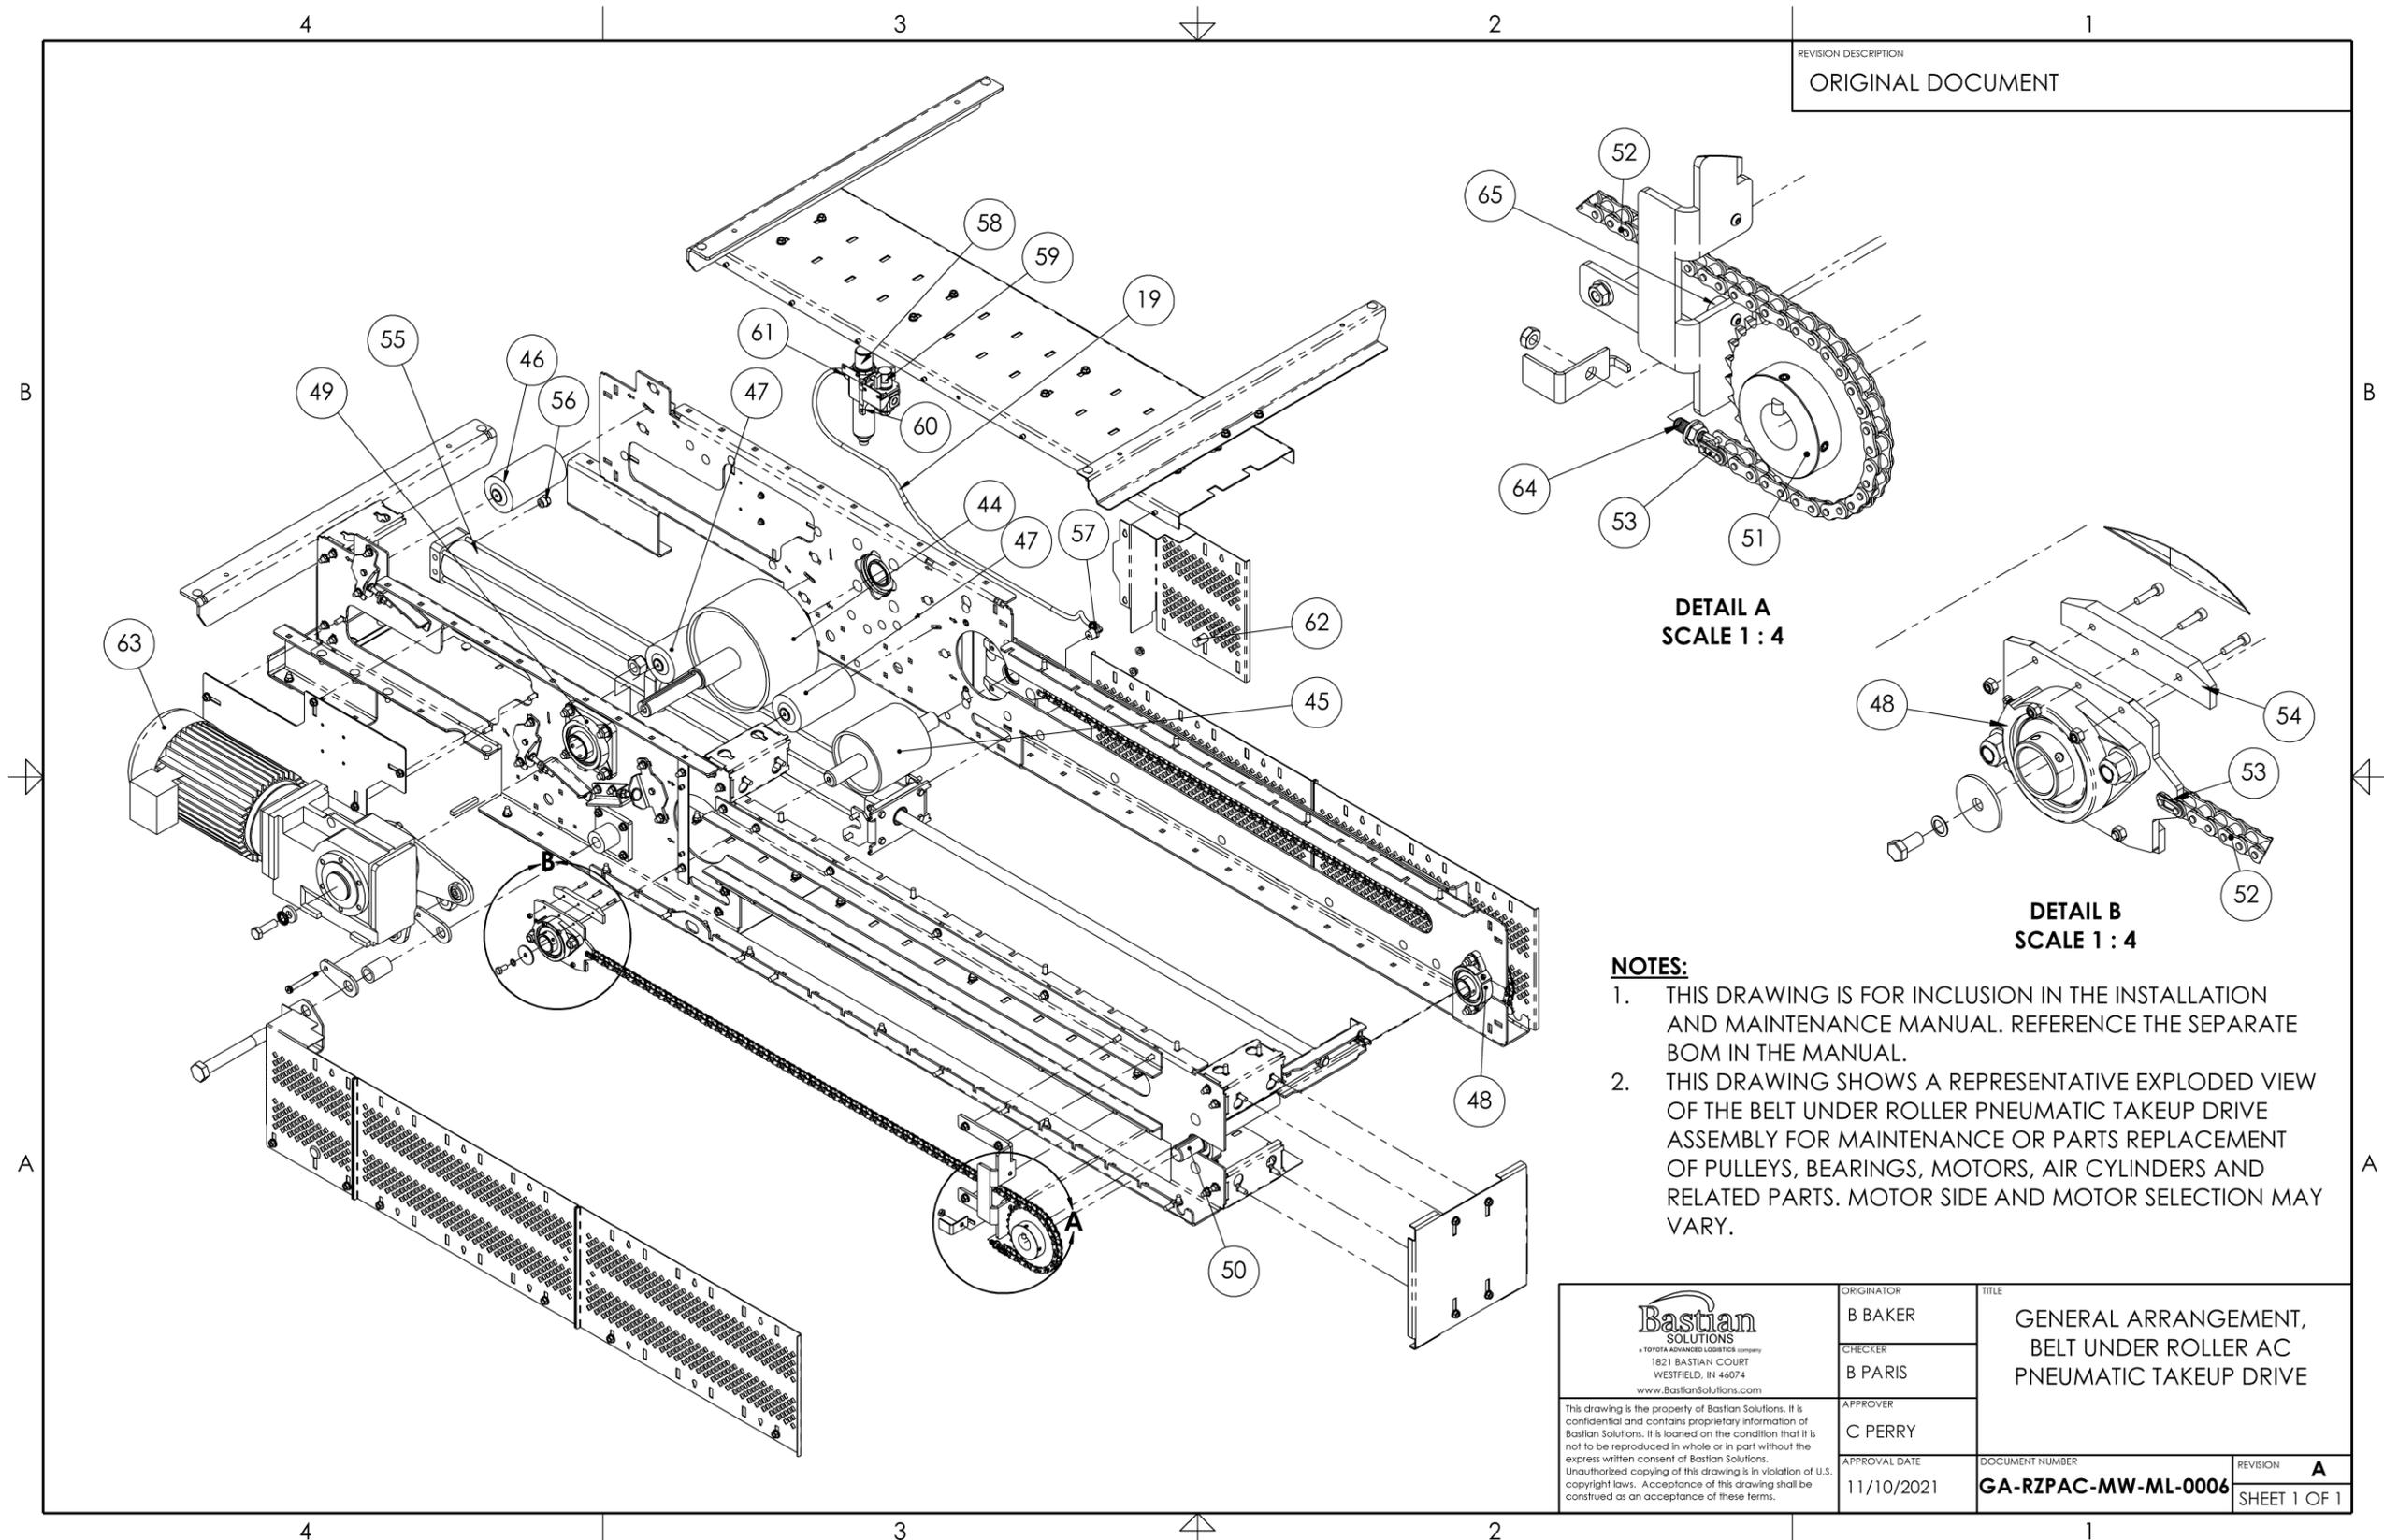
General Arrangement, Belt Under Roller AC, Pneumatic Takeup Drive, Sheet 1 of 1
